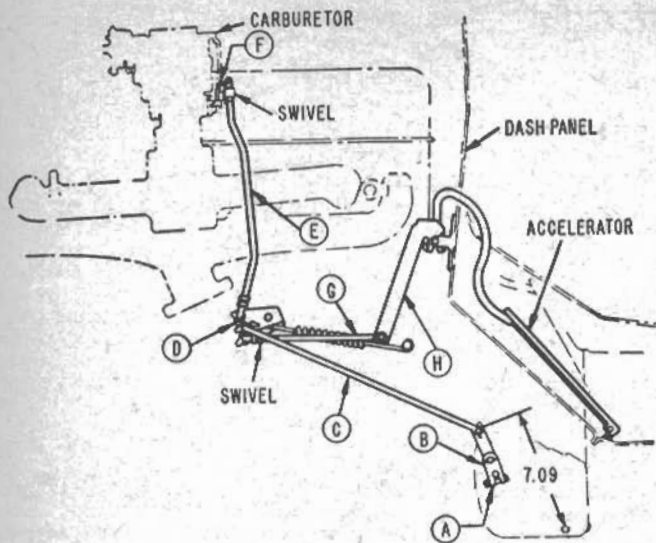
Throttle linkage adjustment. 1958 Six-cylinder Powerglide
